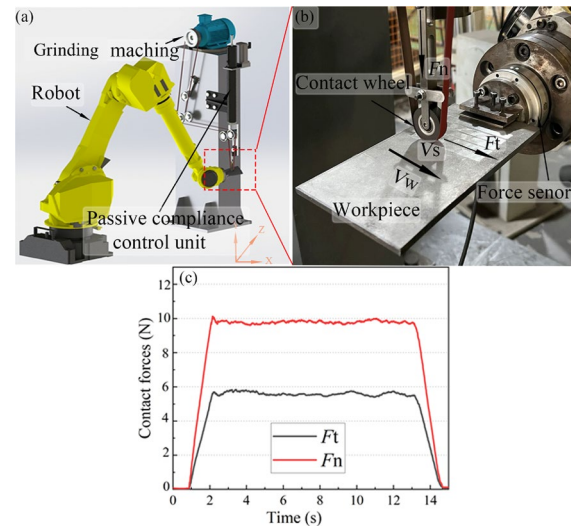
Experimental setup of robotic belt grinding: (a) Platform, (b) Grinding process, (c) Force profile with $V_s = 10$ m/s, $V_w = 5$ mm/s and $F_n = 10$ N using EOL-belt
